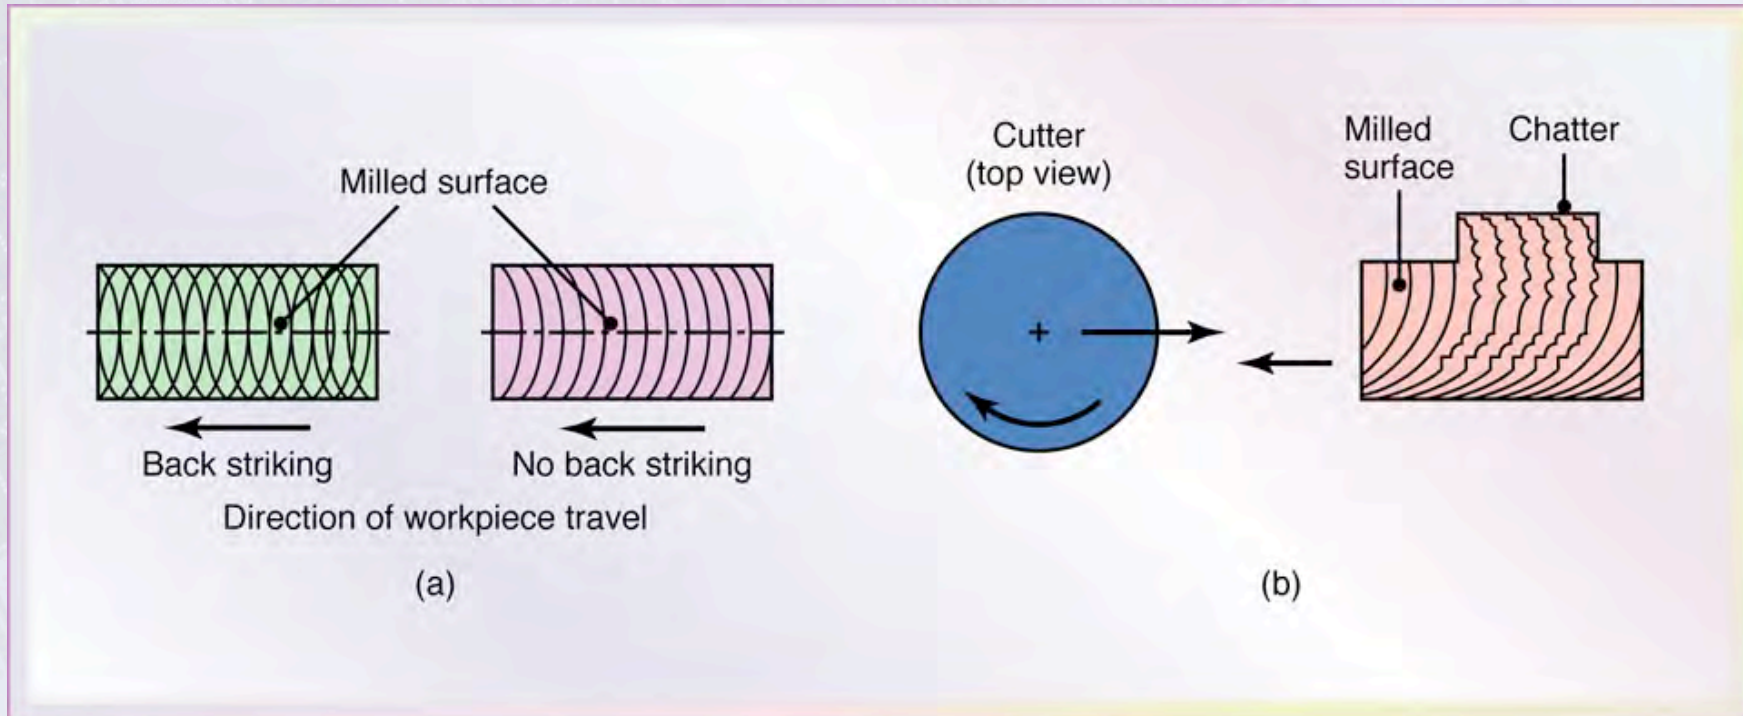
Machined surface features in face milling. See also Fig. 24.6.
